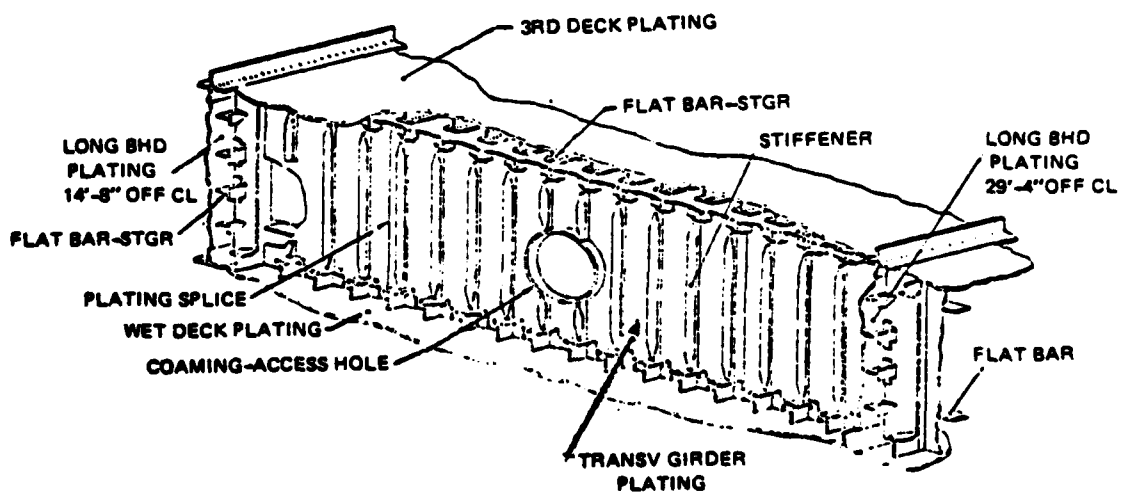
Stiffened Plate Girder (Looking Forward)
